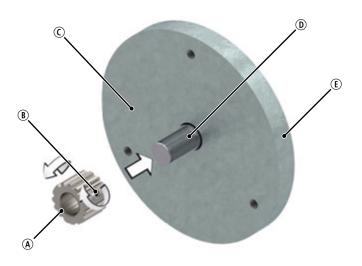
Using grub screws (sizes 01 and 02) to mount the hub
